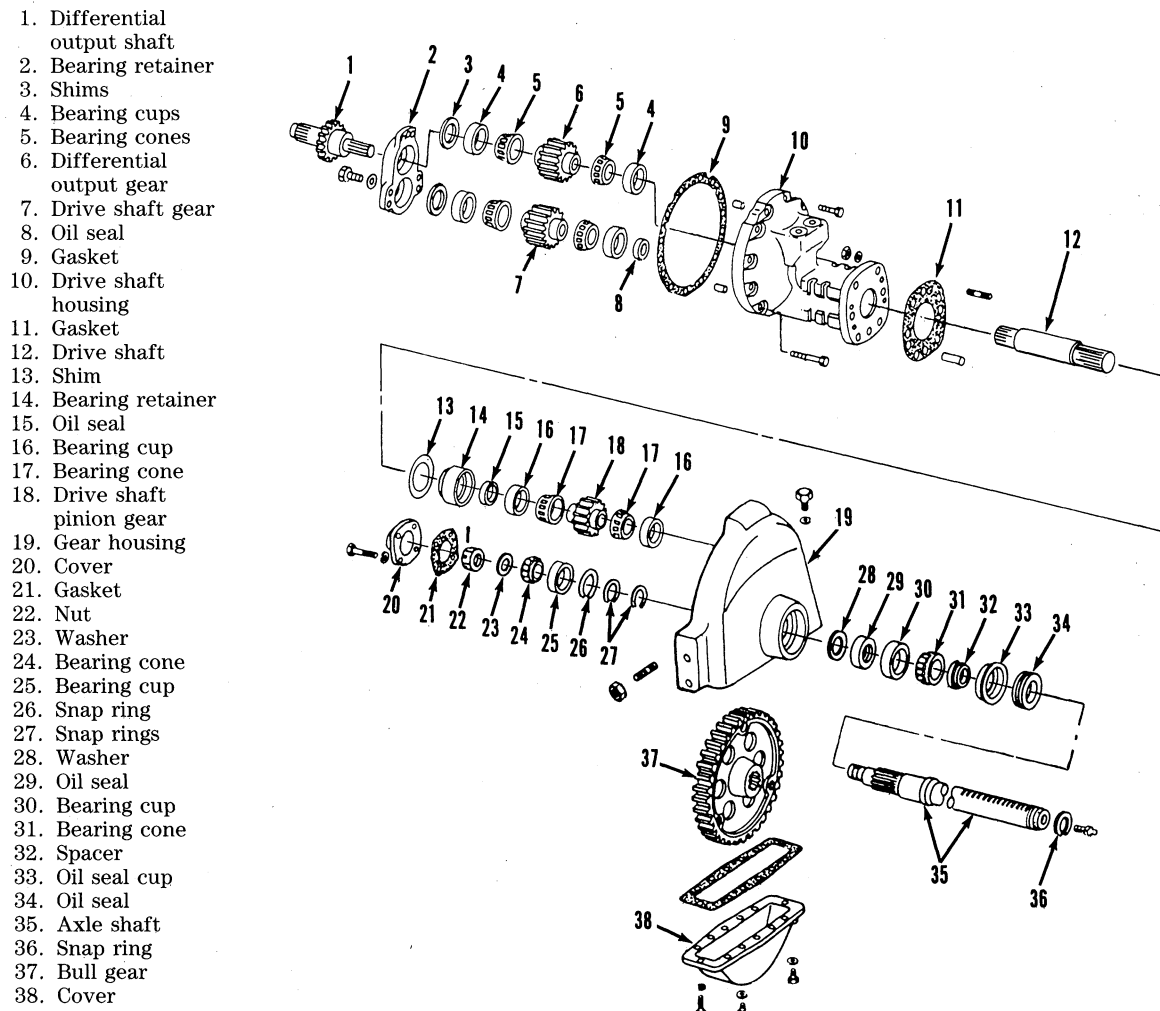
Exploded view of high clearance final drive assembly which is available on some models.
